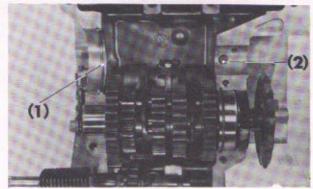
(1) Ball bearing set ring (2) Knock pin
